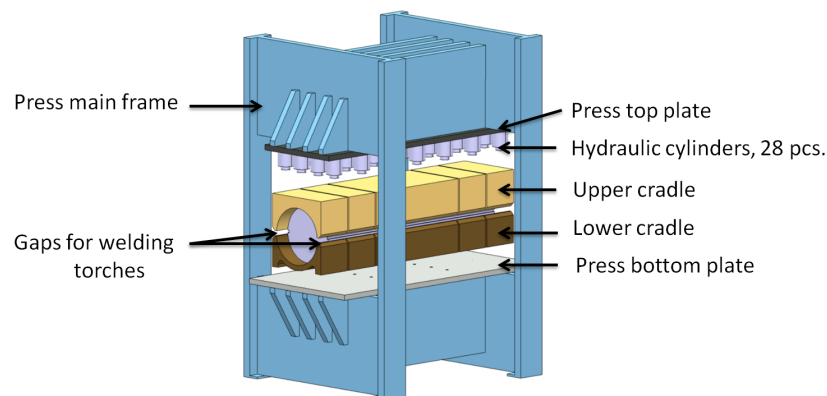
The skinning press with cradles. The upper cradles can be loaded by 28 hydraulic cylinders with the maximum achievable vertical load of 375 t/m. The openings for longitudinal welding can be seen on the sides of the cradles.
